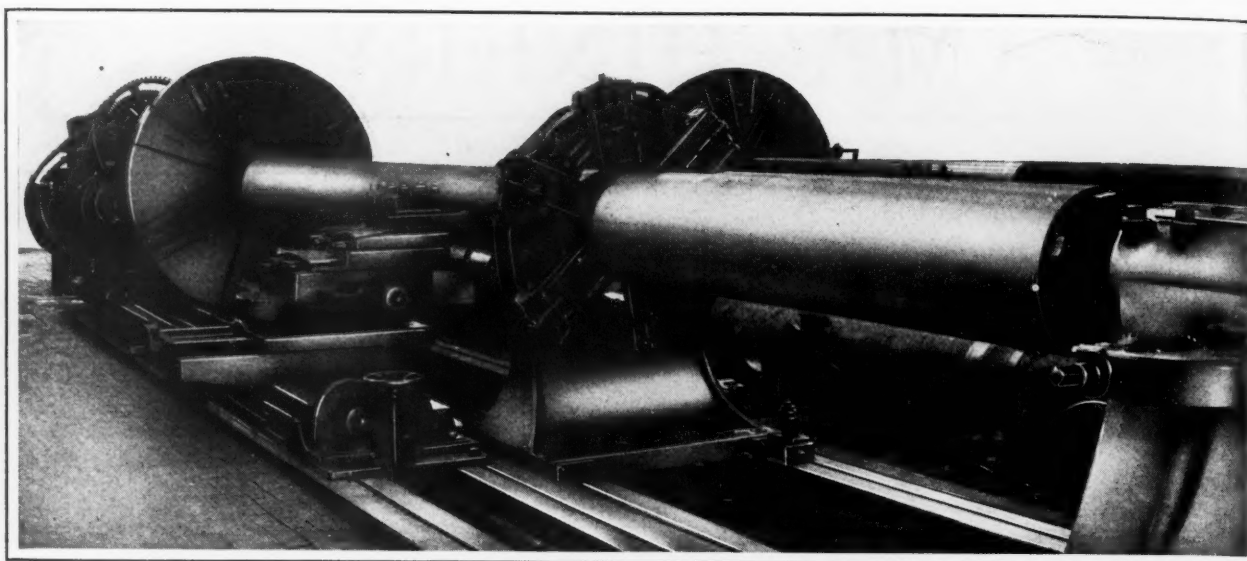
Turning the Main Tube of a 16-inch Howitzer in a Lathe that may be Extended to Receive Forgings 70 Feet Long
